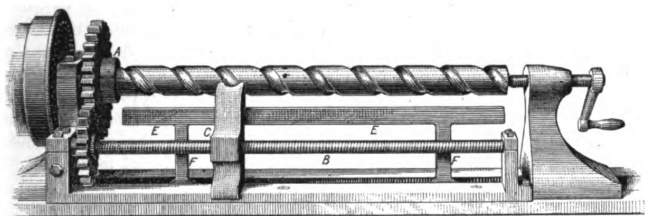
Attachment for Cutting Spirals in the Lathe.
